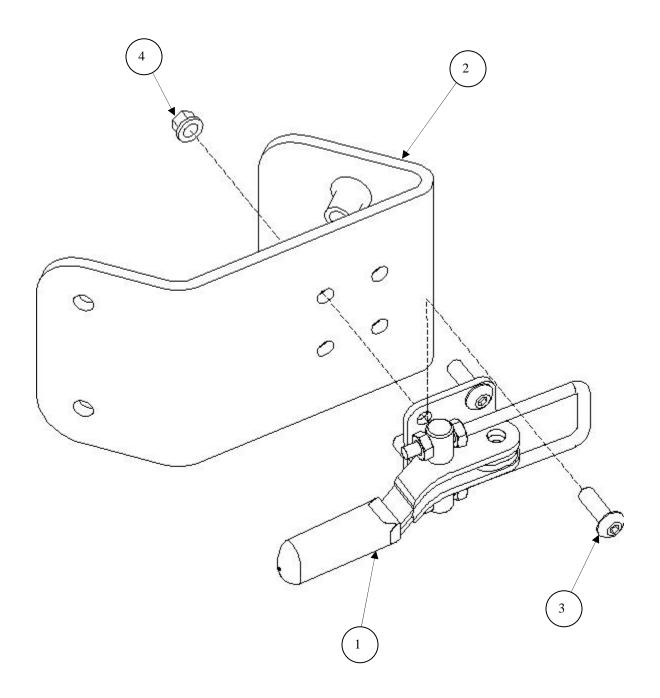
Escape Hatch Mounts Pre-Assembly.
